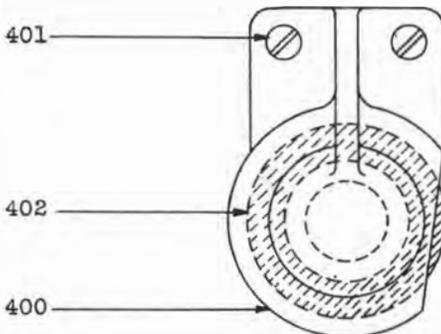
Where Roll Guard is Secured to Bearing Box Cover by Screws (Worm End)
